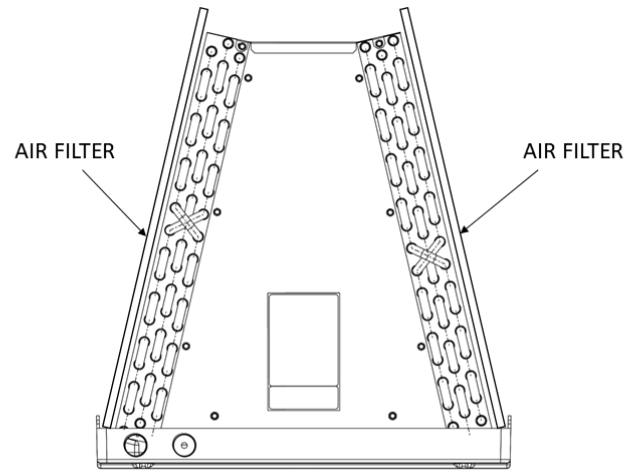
M-SERIES PREMIER EVAPORATOR COIL
